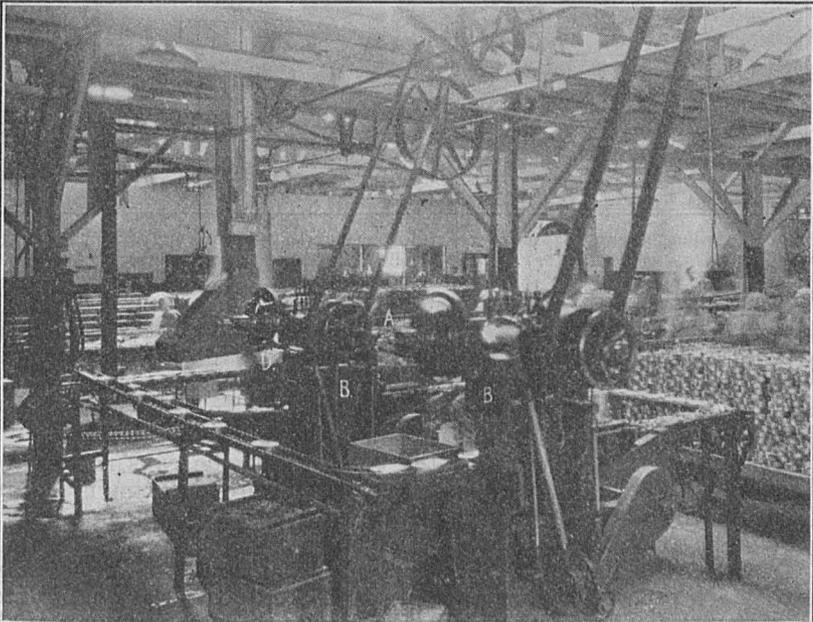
Exhausting the cans. The filled cans from the packing tables pass through the machines B, which lightly crimp lids on them. The cans next enter the exhaust box C at D. E is a stock of filled cans ready for exhausting
